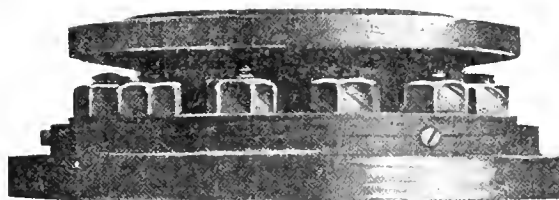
CYCLOID THREAD-MILLING CUTTER
